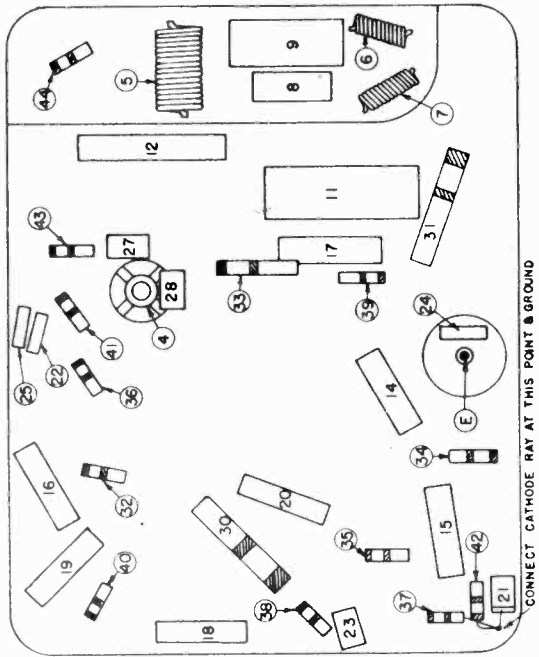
PARTS LAYOUT--DASH UNIT--Bottom View
